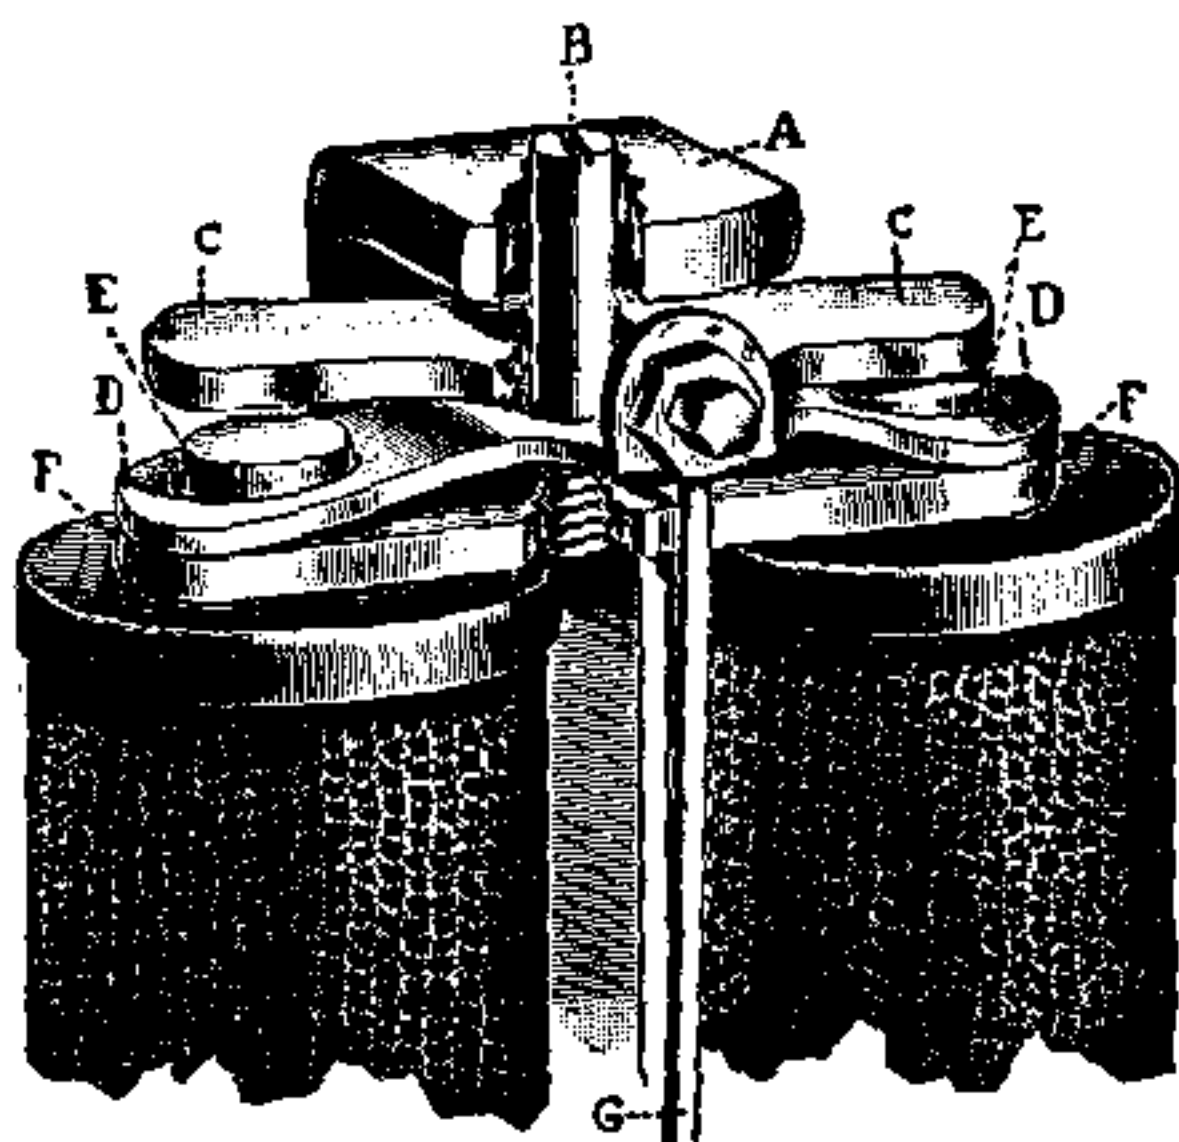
ADJUSTMENT OF STROMBERG-CARLSON RINGER.
